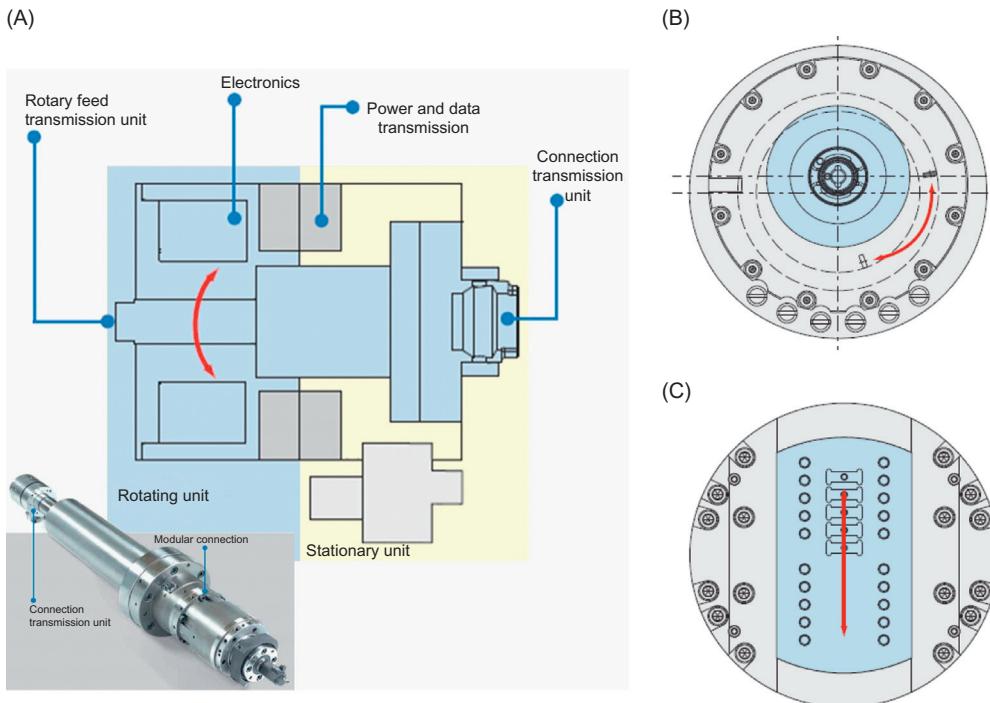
Actuated micro-boring system (A); eccentric (B) and linear (C) actuating tools [33].
